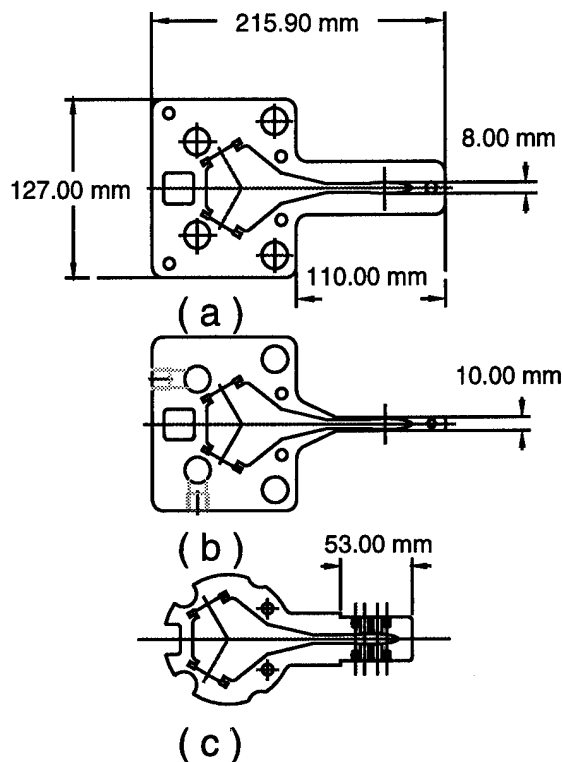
Cross-section of the 8-mm ID vacuum chamber. a) extrusion, b) after machining, c) end geometry showing the locations of beam position monitors.
